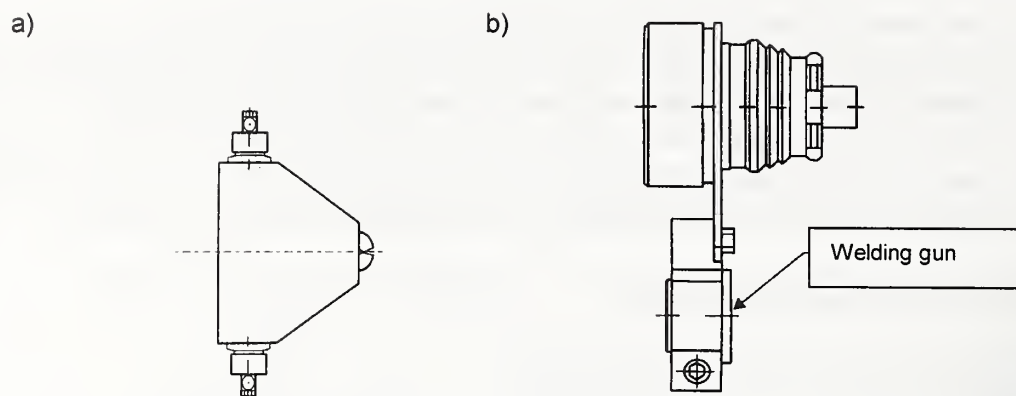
Auxiliary devices: a) electrode wire tip cutter UT-2, (b) anticollision welding torch holder
